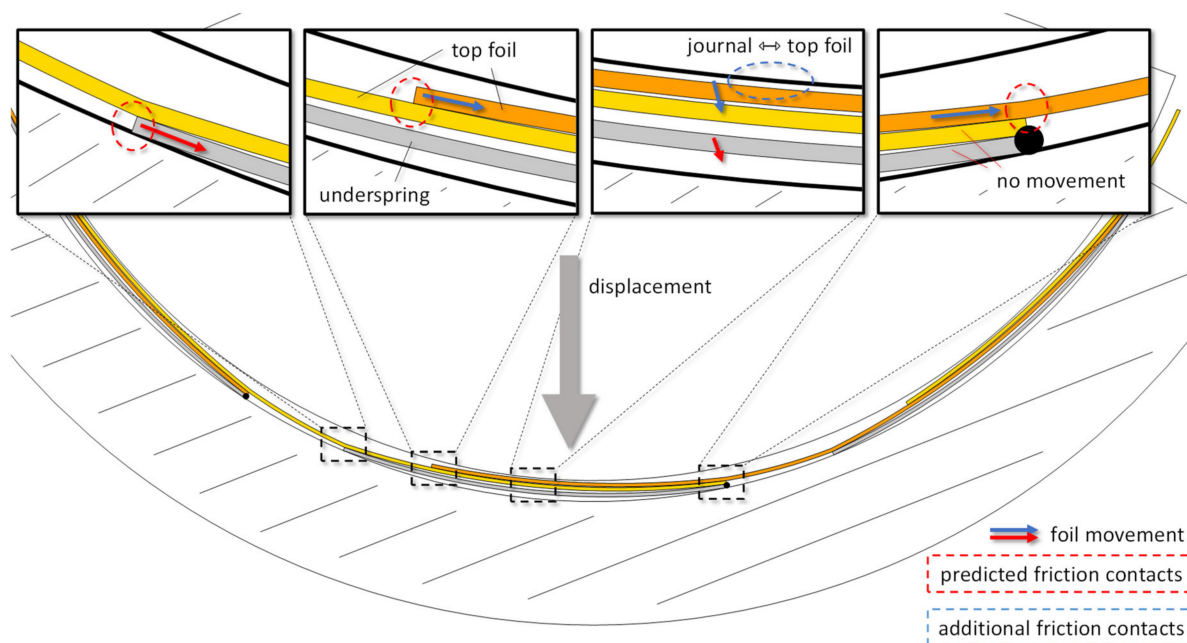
Contact zones between the journal, the foils and the bearing ring (true to scale).
